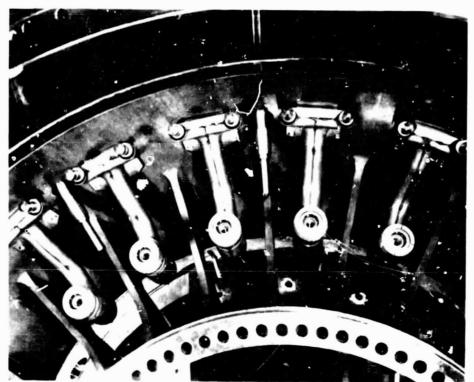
Combustor Component Diffuser Case Assembly With Several Fuel Nozzle Supports and Station 3.0 Pressure and Temperature Probes Installed
